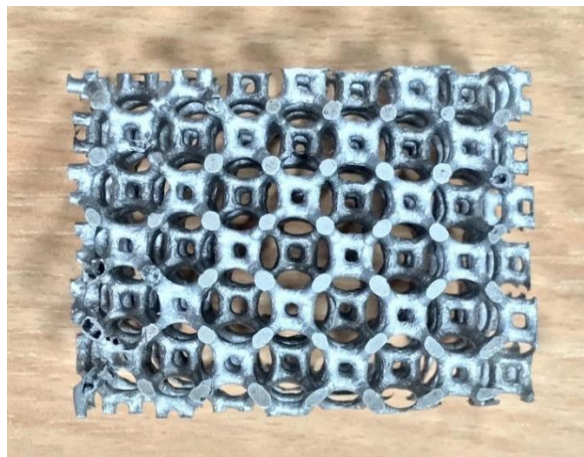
Metal foam fabricated by the improved infiltration casting method
